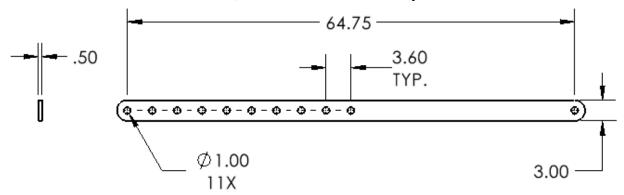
Scissor Arm Dimensions. The rightmost hole fits into the base while the leftmost hole attaches to the table surface fixtures. Note that the features defined in this drawing are not exhaustive, but rather highlight the more critical dimensions for reference.
